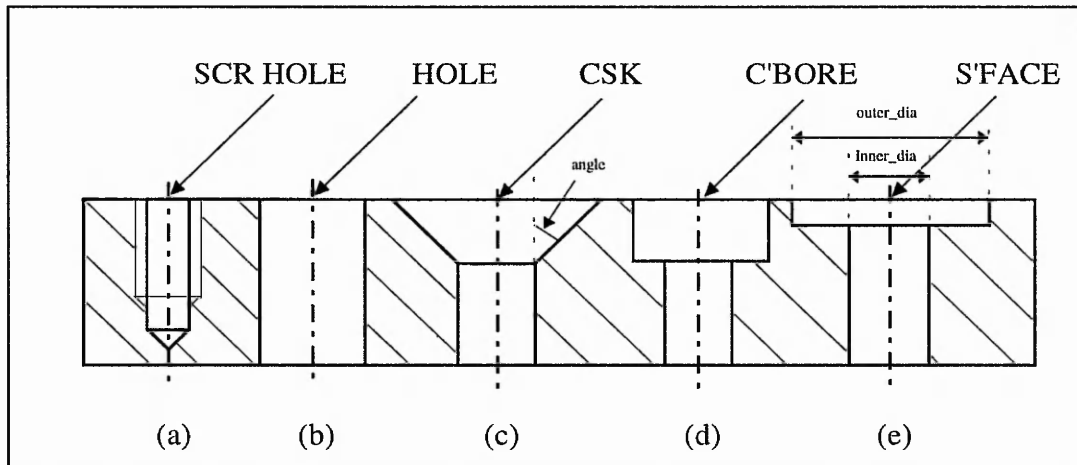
Cross section of different types of Holes: (a) Screw hole; (b) Simple hole; (c) Countersink hole; (d) Counterbore hole; (e) Spot face hole.
